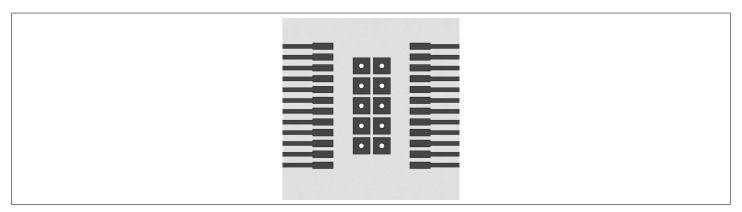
Thermal vias on PCB for 2s2p PCB setup
